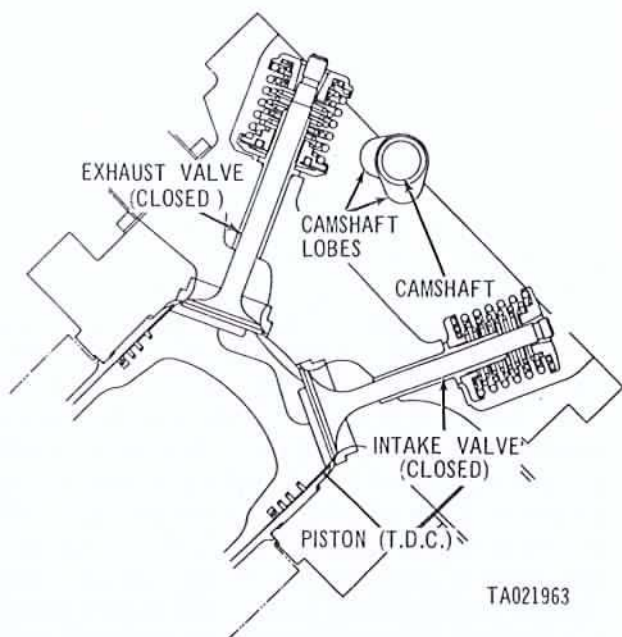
Correct position of camshaft lobes (cams) for fuel injection pump installation - sectional view.
